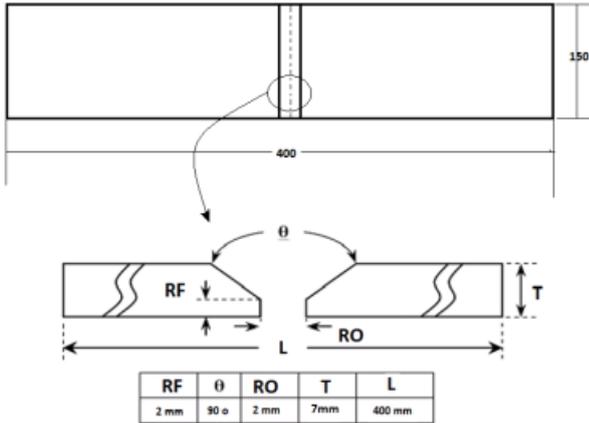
Dimensional Details Of The Pipe Specimens (Not To The Scale)
